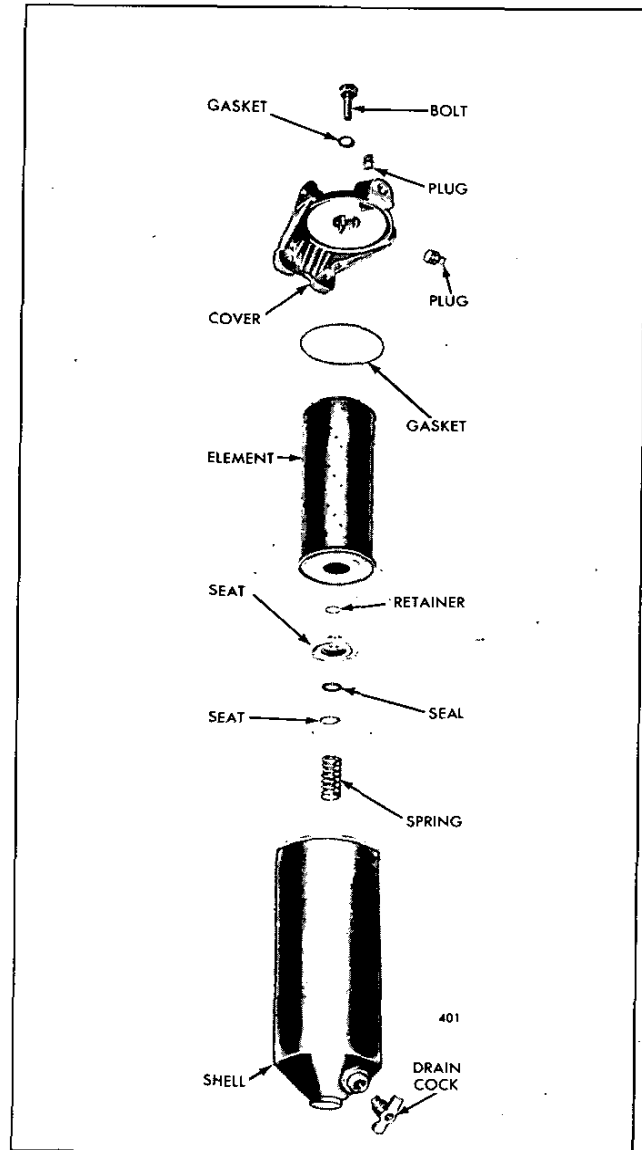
Fuel Filter Details and Relative Location of Parts
